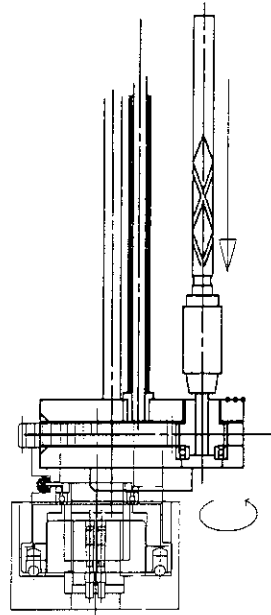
Procedure by handling tool for 2nd step connector
